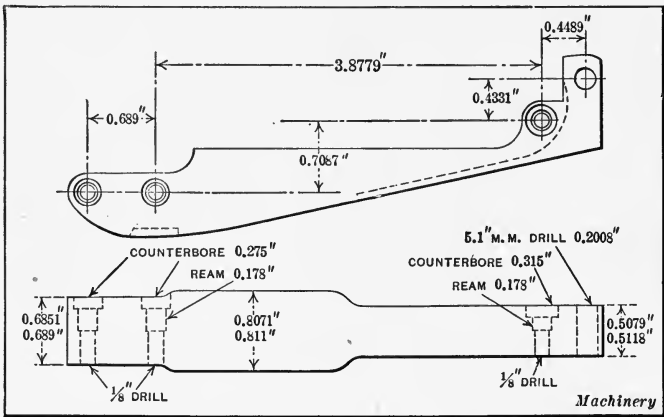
Rifle Receiver Floor-plate which is drilled, reamed, and counterbored in Machines shown in Fig. 11
